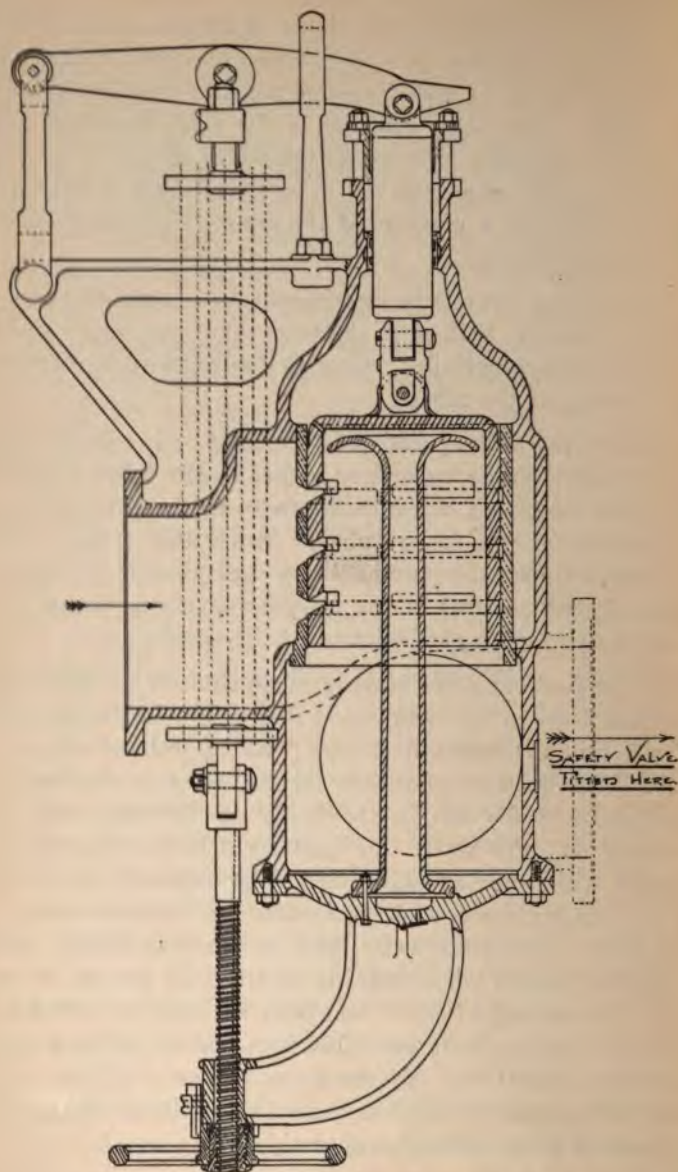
BELLEVILLE BOILER REDUCING VALVE.
